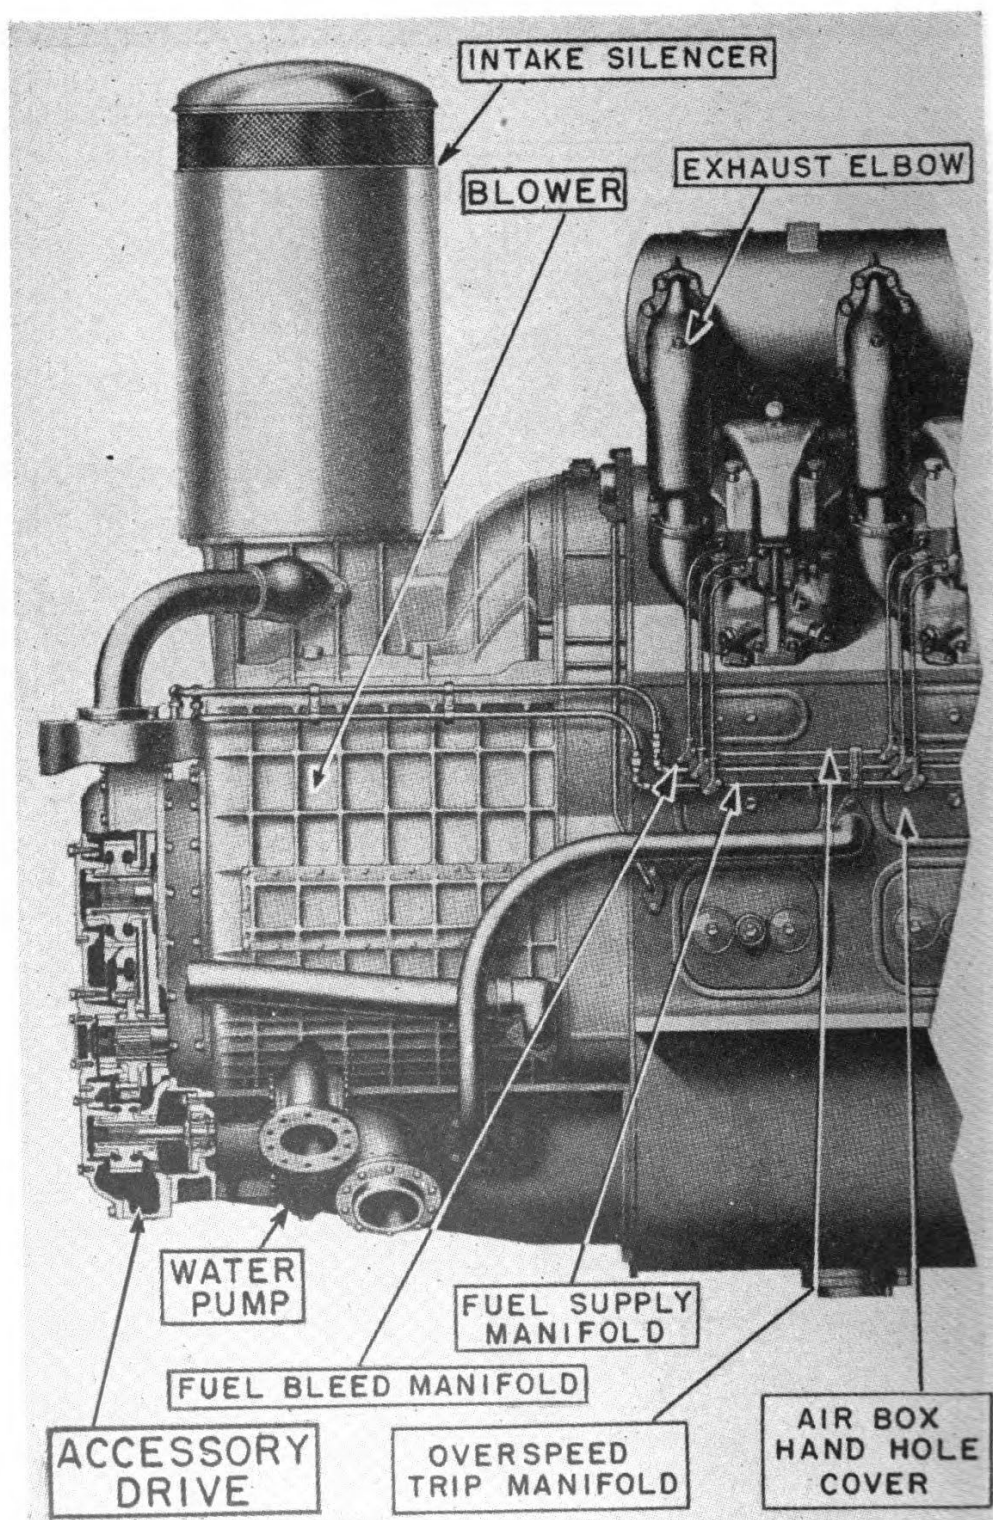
Location of drive mechanisms in a V-type engine (GM 16-278A).
